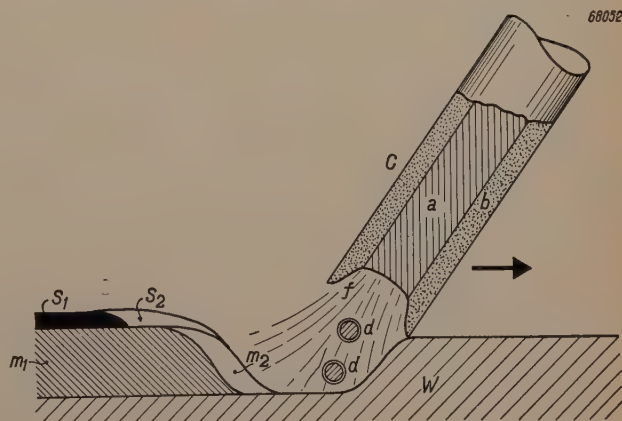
The melting down of a Contact welding rod. The arrow indicates the direction of travel. C welding rod with core a and coating b (containing iron powder), W workpiece, d droplets of molten iron,  $m_1$  solid and  $m_2$  liquid metal of the weld,  $s_1$  solid and  $s_2$  liquid slag. The depth of the cup f is such as to allow of touch-welding with this electrode.
